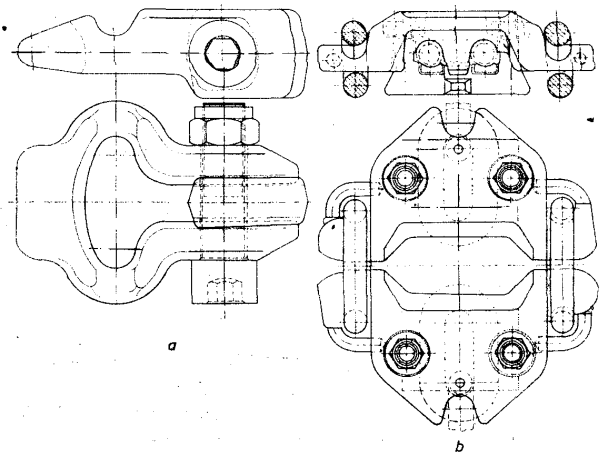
Chains merge elements of type-eye swivel bearing; b-type
